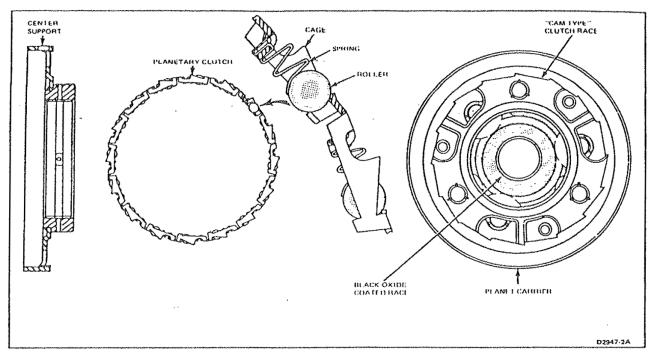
Roller Type Planetary Clutch, Carrier and Center Support-
